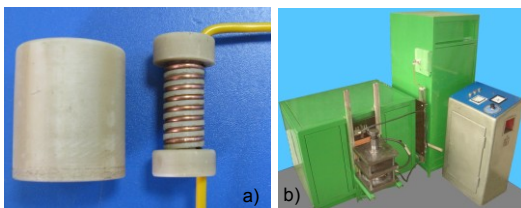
Experimental setup: a) Coil assembly (coil housing - left); b) Electromagnetic forming equipment.
